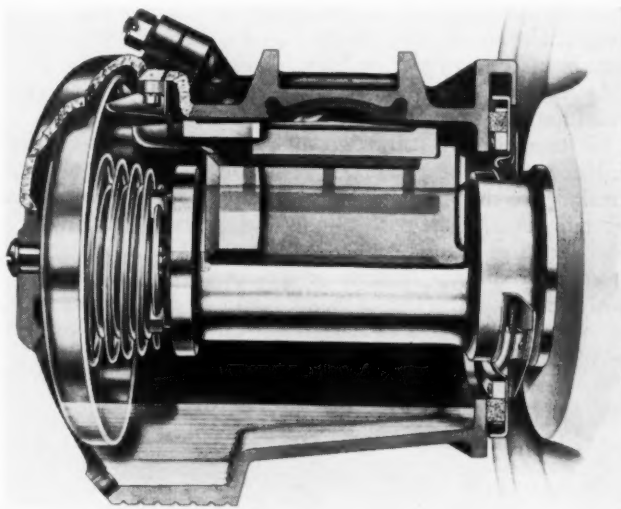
NATIONAL BEARING METALS CORP. "DISC-FLO" JOURNAL BEARING
